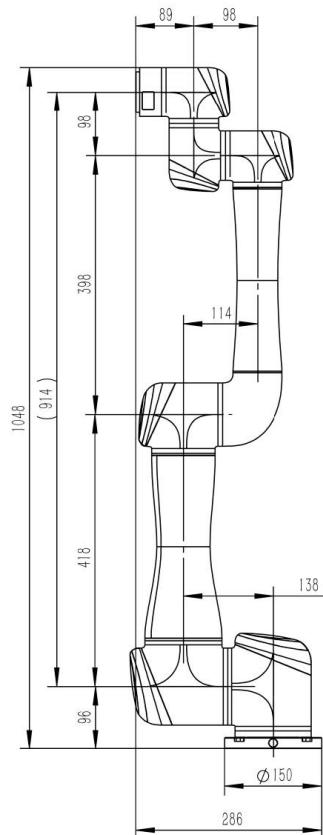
Mechanical dimensions of the EC66 robot, with unit of mm
